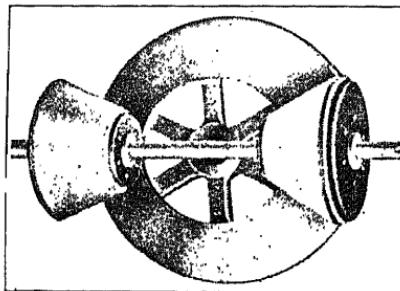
Bevel friction gearing. Iron and fiber wheels. Reversing cones. The Medart Co., St. Louis.
